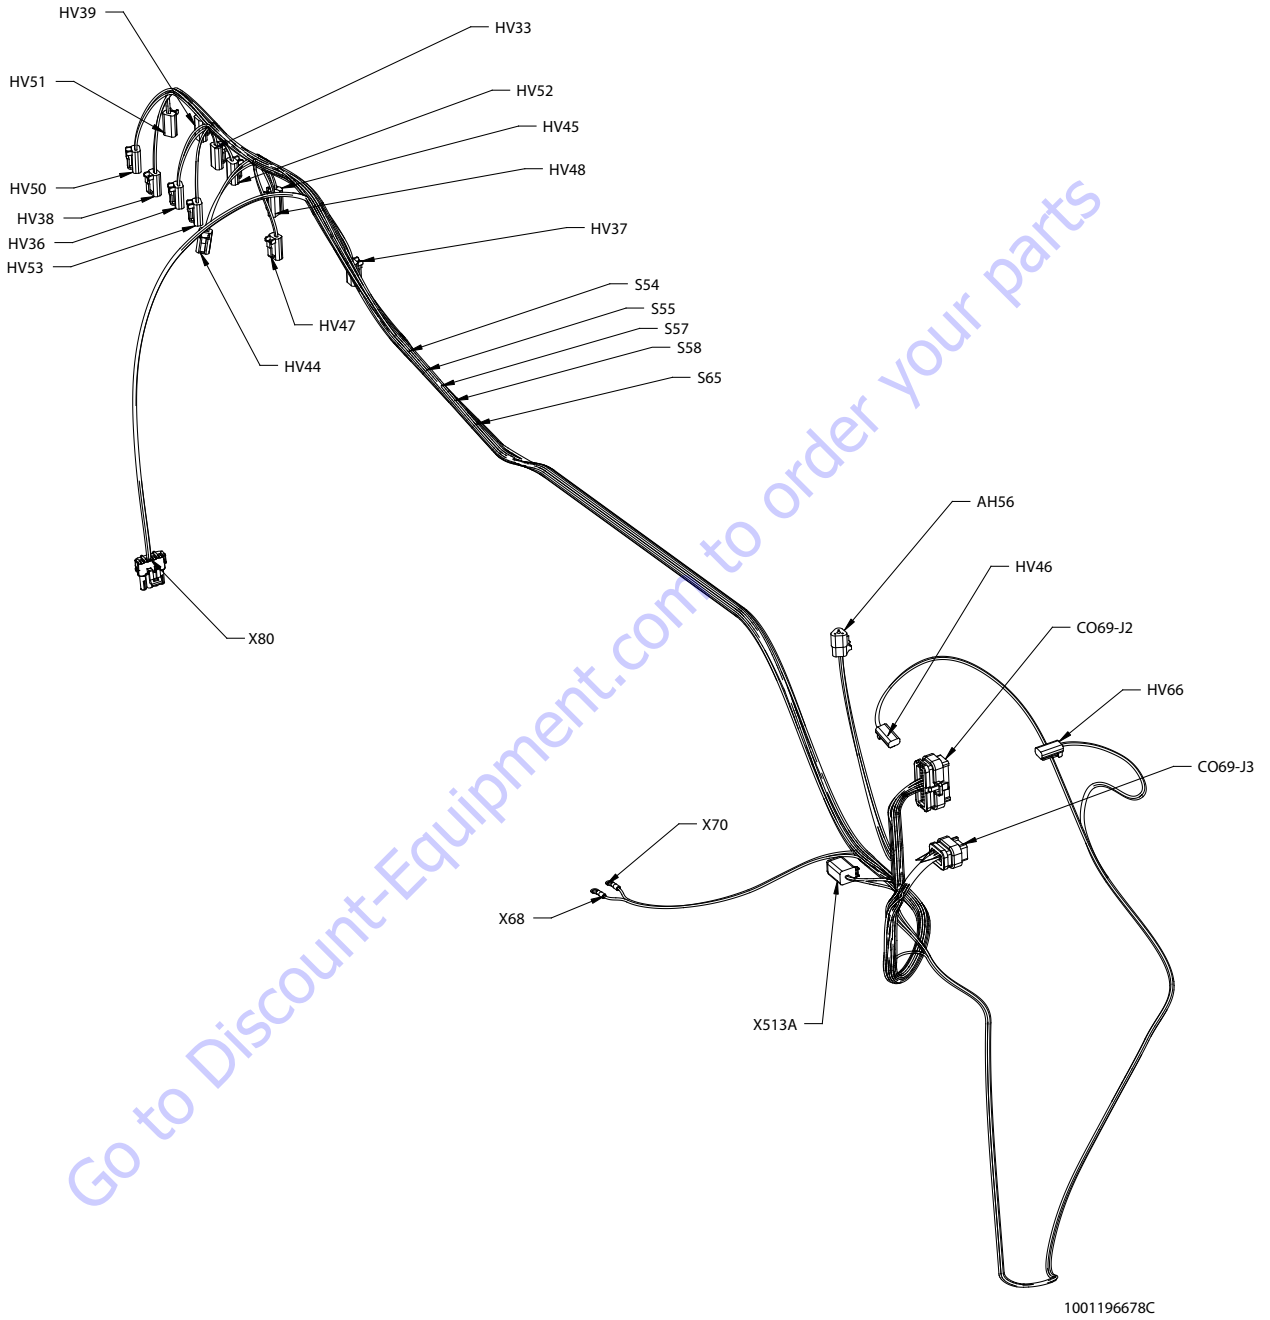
400SC Main Valve Harness - Sheet 6 of 6
